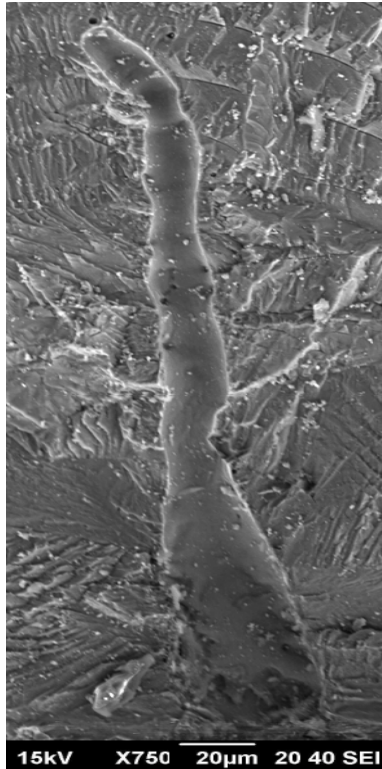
A scanning-electron microscope image of the fracture surface of the aluminium alloy showing a typical laser induced notch and the subsequent fatigue crack radiating from this notch.
